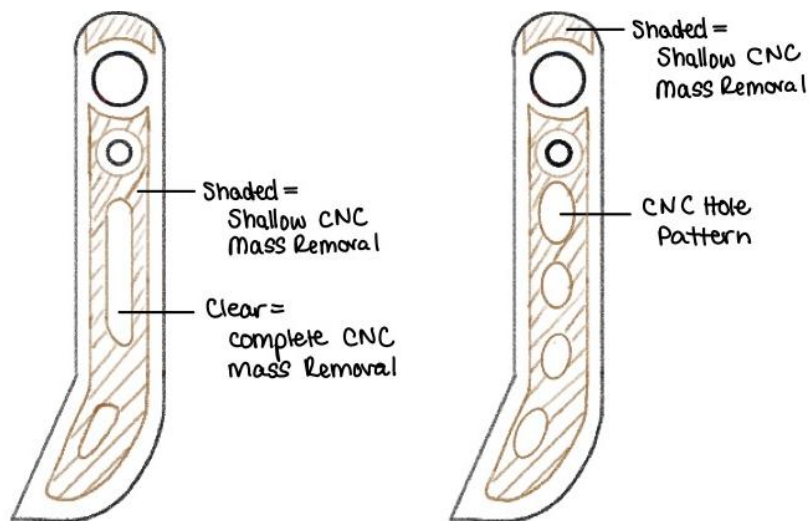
Sketches for revised Aluminum V2 with alternative weight savings approach. Features a CNC milled pattern with the addition of shallow material removal in addition to holes.
